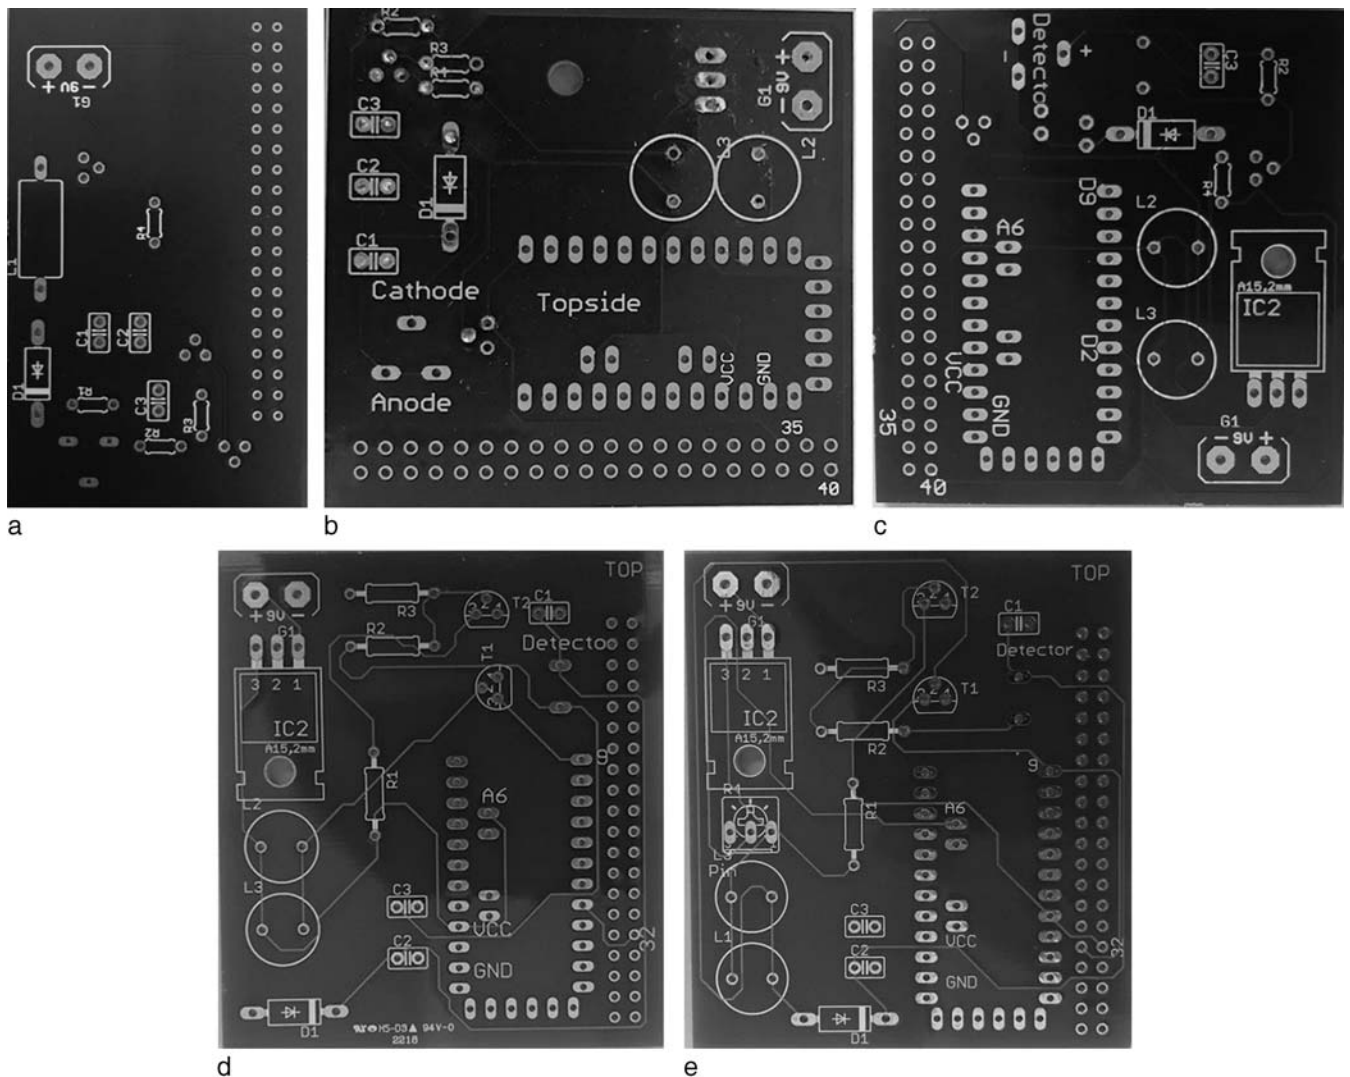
Evolution of the circuit illustrated by printed circuit board (PCB) showing a) First attempt with 40 pin holes on the right too small to accommodate the Raspberry Pi GPIO pins; b) Modified PCB design with improper ground wiring; c) Functional PCB with Arduino included; d) Revised design with greater separation of components to ease assembly; e) Modified design with a potentiometer added to adjust the voltage.
